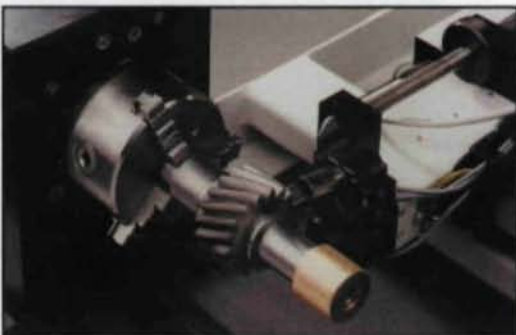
Photograph of gear contact with helical-type gear. (Photo courtesy of Stresstech Oy, Finland.)
